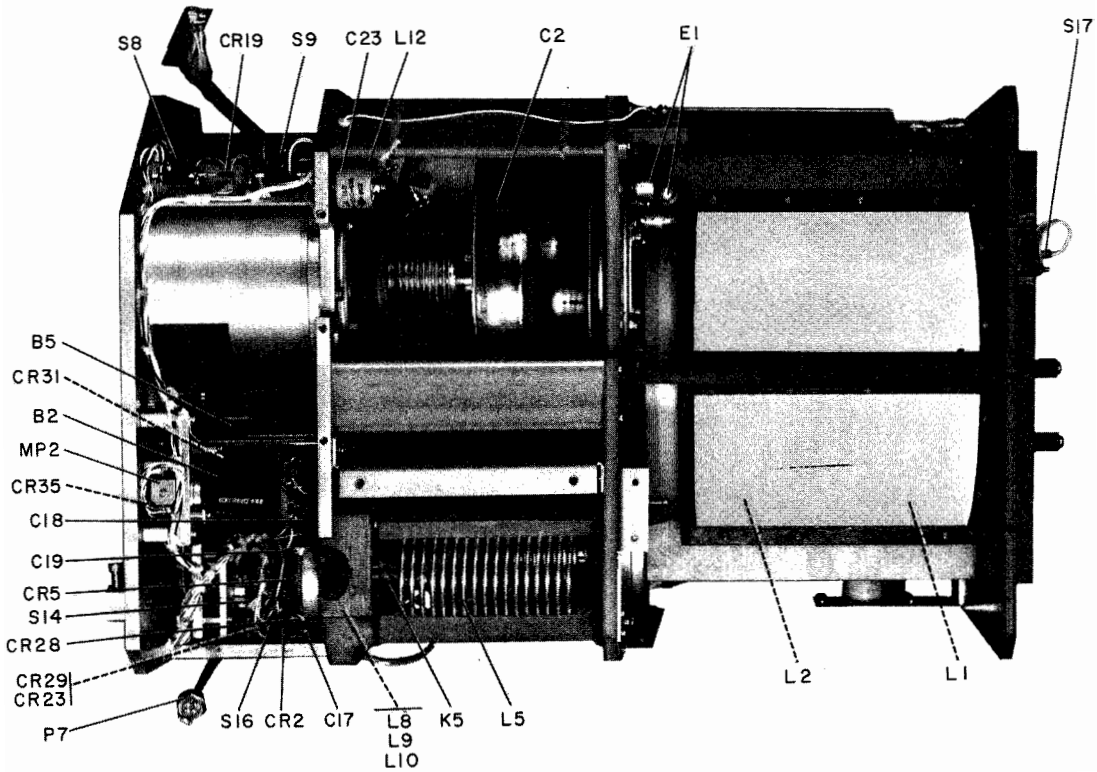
Series-Parallel Circuit Assembly, Right Side, Parts Location
